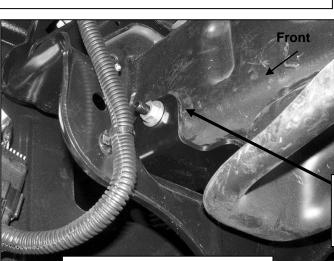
Driver side pictured without plastic panel for instruction purposes only
